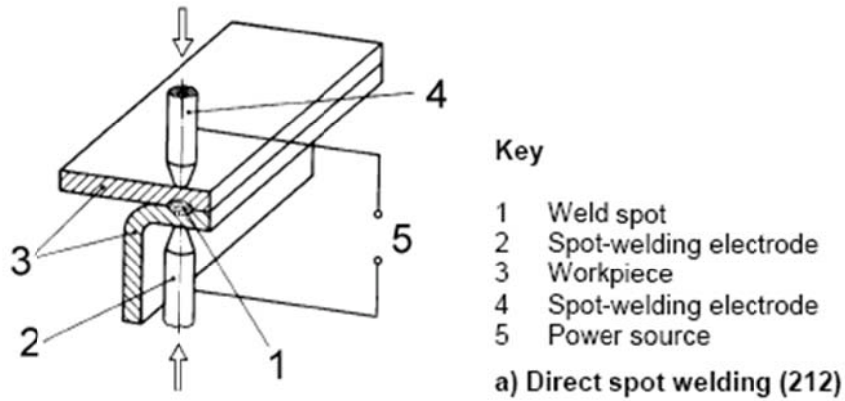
'Direct' spot welding (ISO 669)
